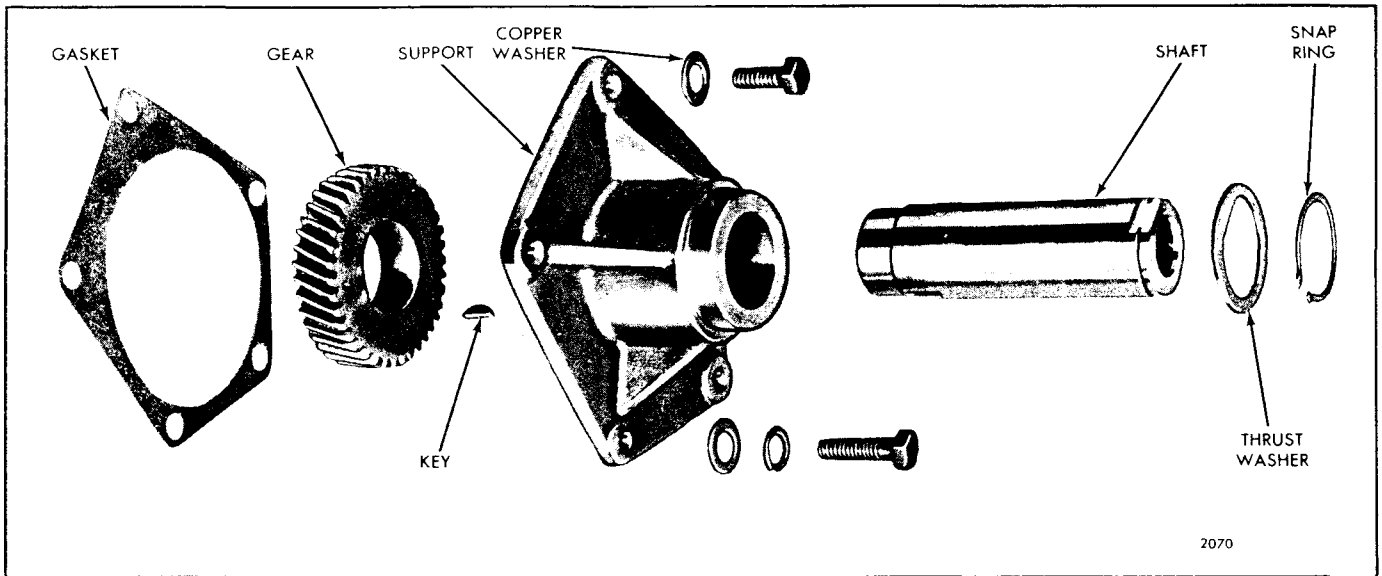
Blower Drive Gear and Support Assembly Details and Relative Location of Parts (In-Line Engine)
